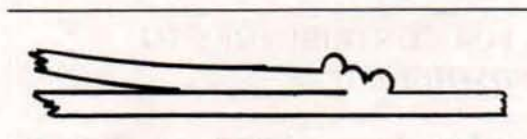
Lap weld. One central weld and two reinforcing welds generally suffice for most orthotics and prosthetics uses.
